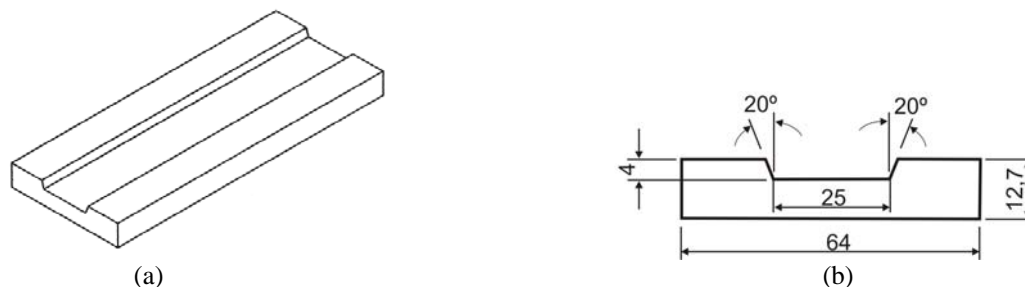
Machined substrate coupon: (a) 3D-coupon; (b) cross section of coupon with its main dimensions (in mm).
